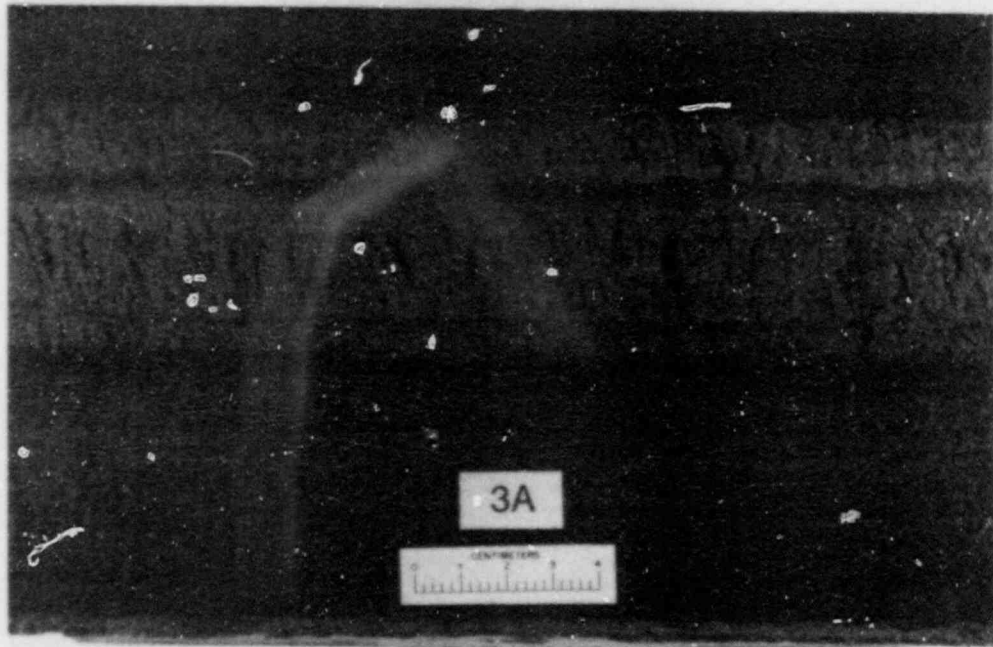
Photograph of fracture surface from PTSE-2. The fracture surface was reassembled from Sects. 1A-6A, which were cut from the test section.
